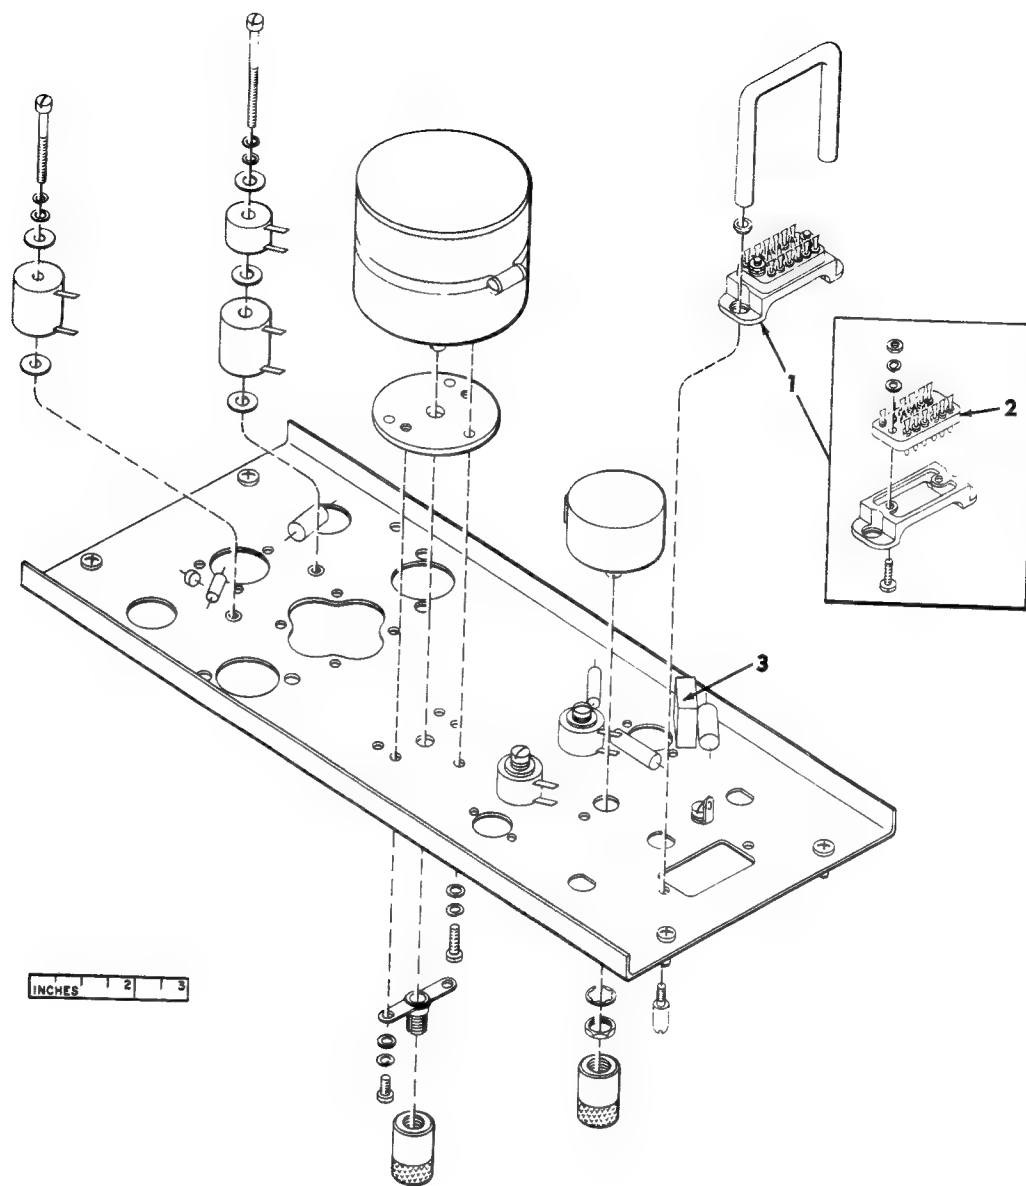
Relay, amplifier assembly (9995581)—exploded view
